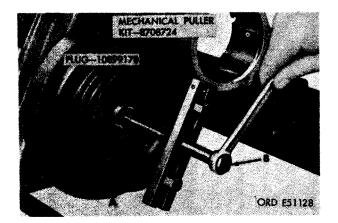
REMOVING OR INSTALLING CRANKSHAFT BOLT LOCK PLATE.
